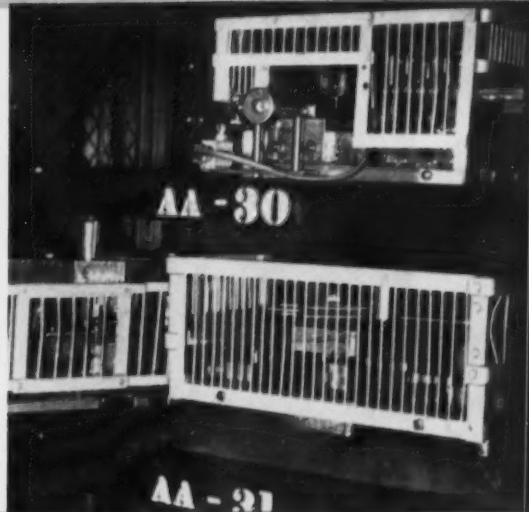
This illustration shows that guards remain with dies even when in the tool crib. Top die is provided with manual knock-out.
